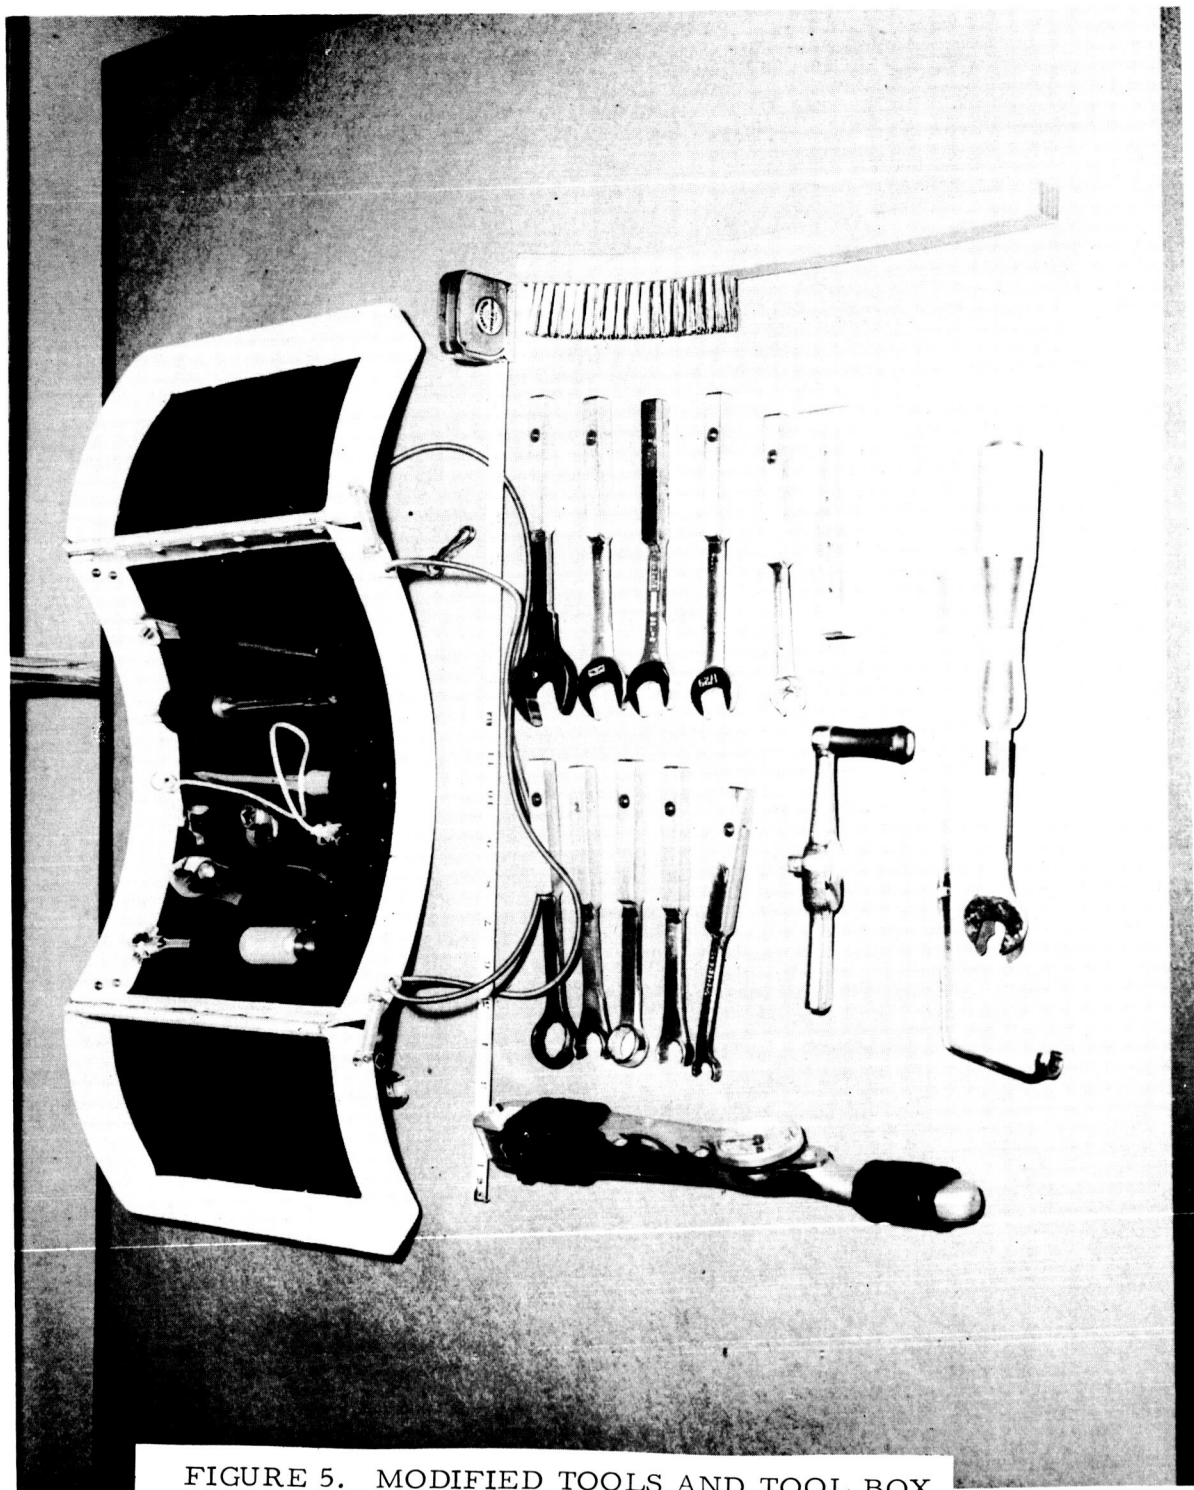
MODIFIED TOOLS AND TOOL BOX
